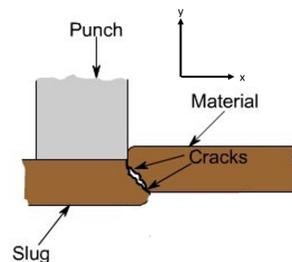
The punch in the diagram is the bullet with cracks appearing in the surface of the material due to uneven force distribution causing shear stress fractures [1]. The slug is the volume of the pan fractured by the bullet (punch).
